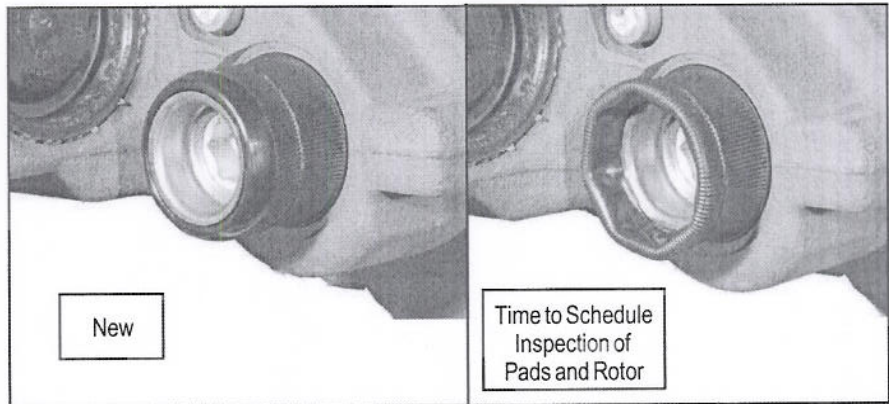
ROLLING BOOT-STYLE WEAR INDICATOR INSPECTION
